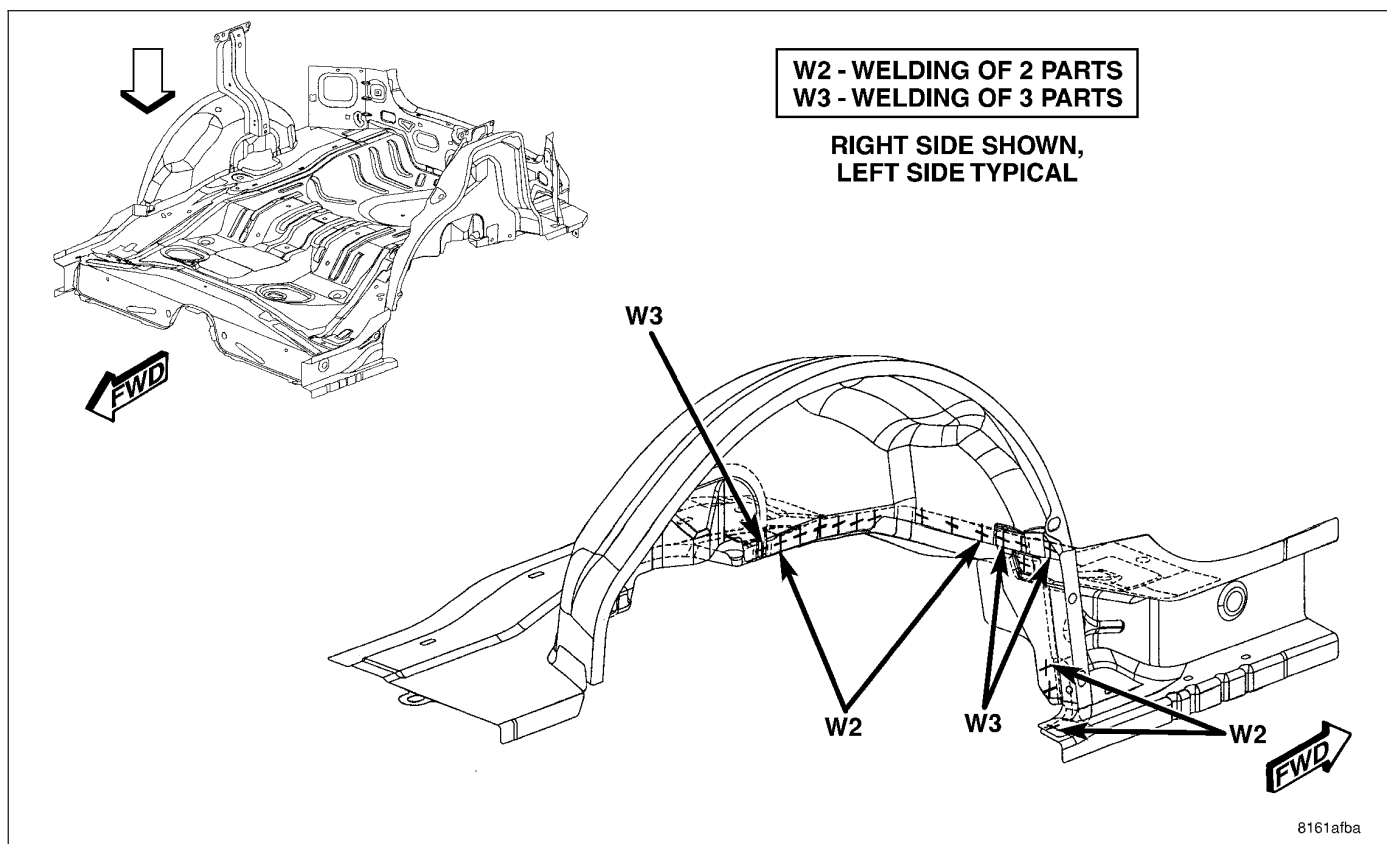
REAR FLOOR ASSEMBLY (3 OF 14)
